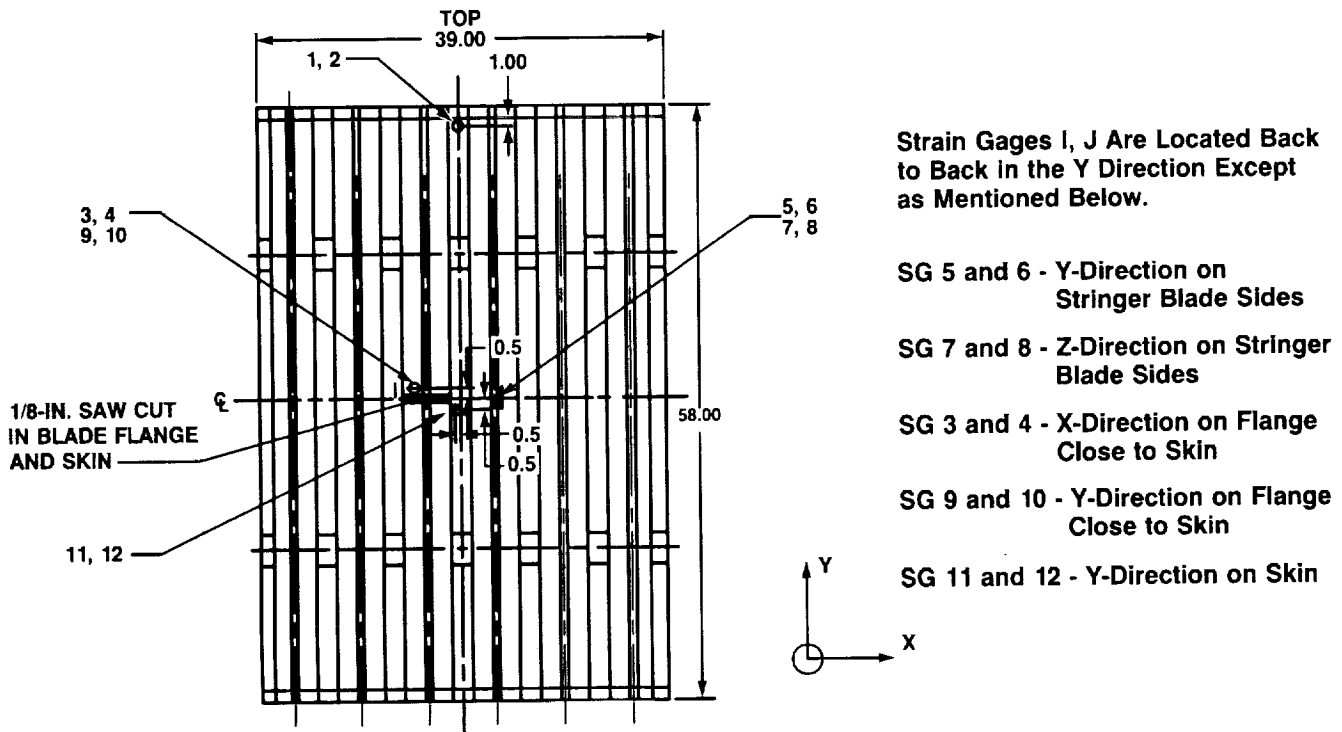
Strain gage locations for six-stringer RTM wing compression test panel
